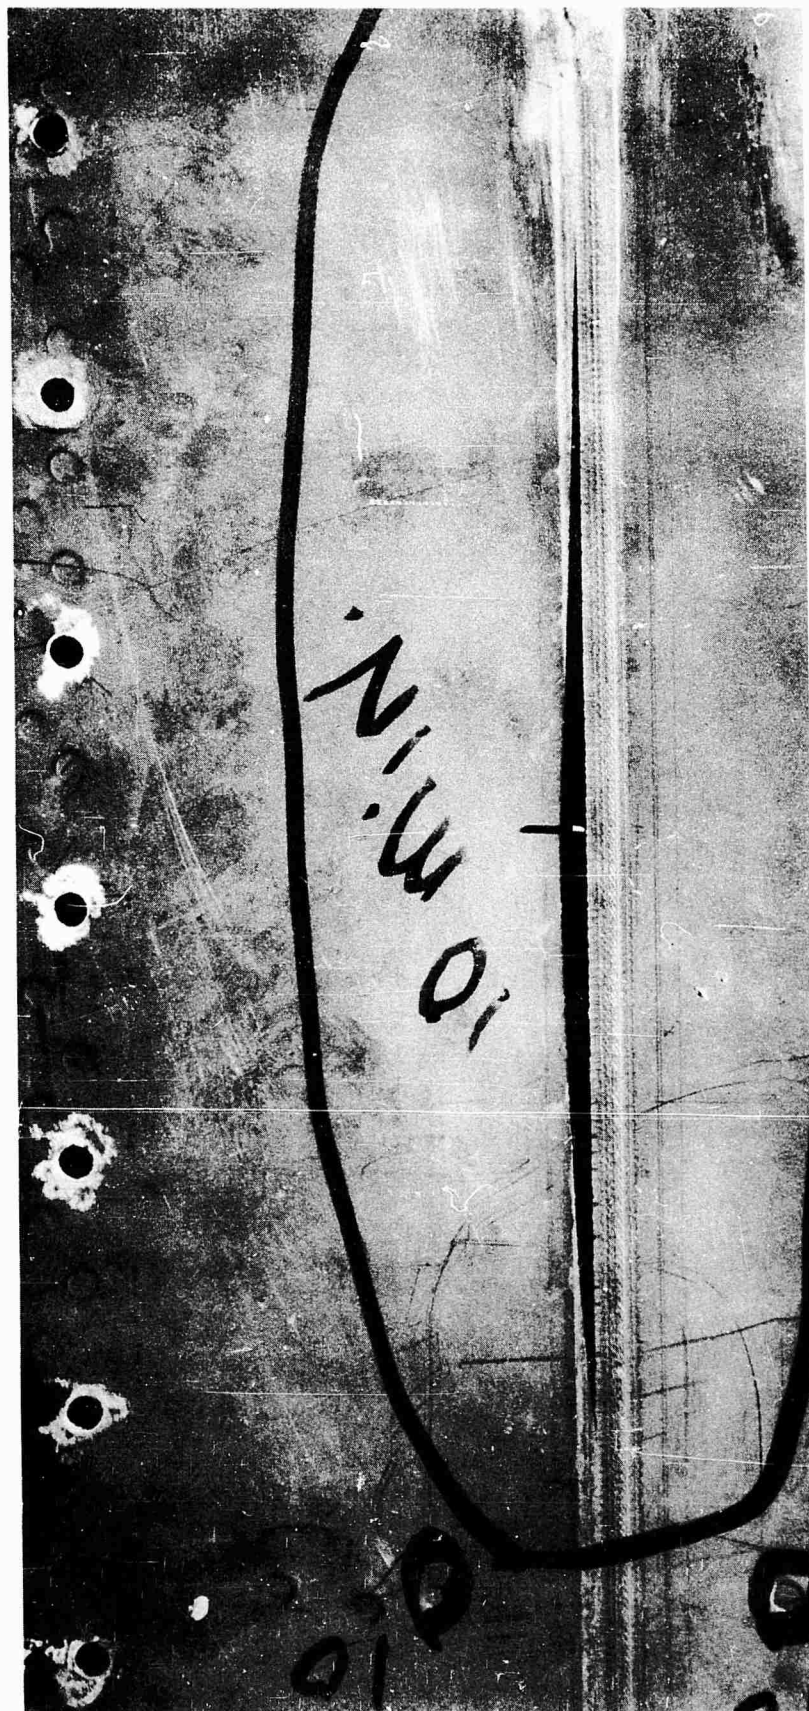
SKIN AND STRINGER FAILURE SKIN AT WELD (1)
